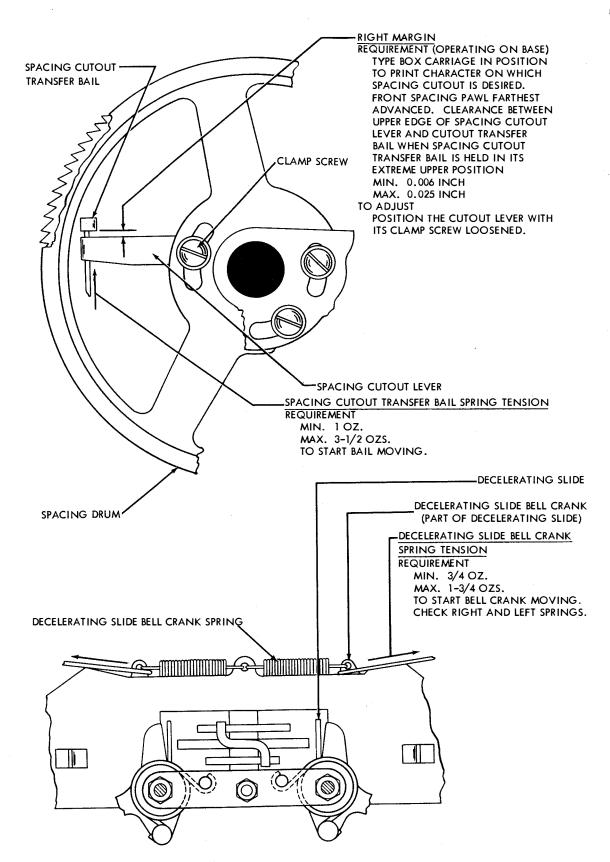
TYPING UNIT, RIGHT MARGIN AND DECELERATING SLIDE MECHANISM, FRONT VIEW
